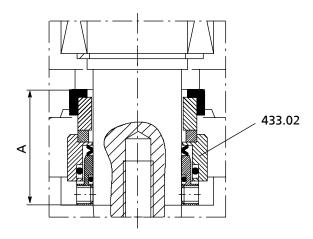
Installation drawing for mechanical seal with covered springs (HJ)
